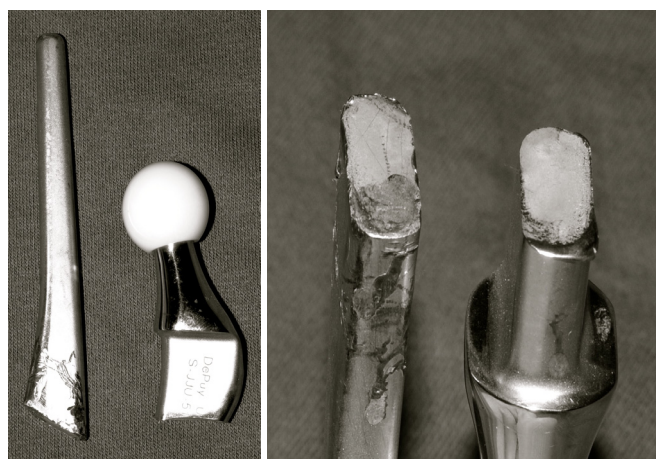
A-1B: Views of the fractured Charnley Stem after removal.
